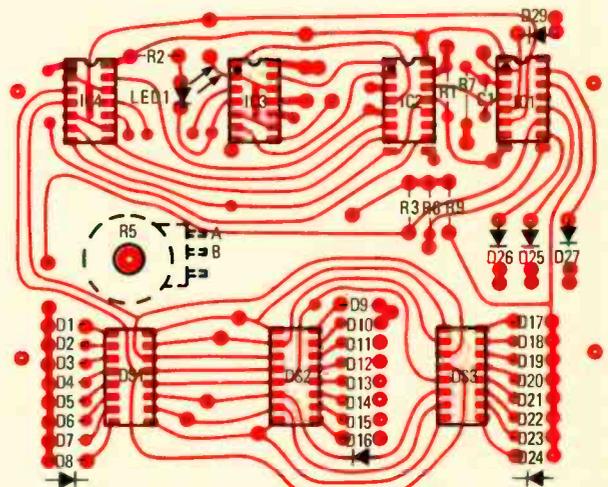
PARTS LAYOUT for the Sequencer board. Be sure to check the polarity of the many diodes that are used.
